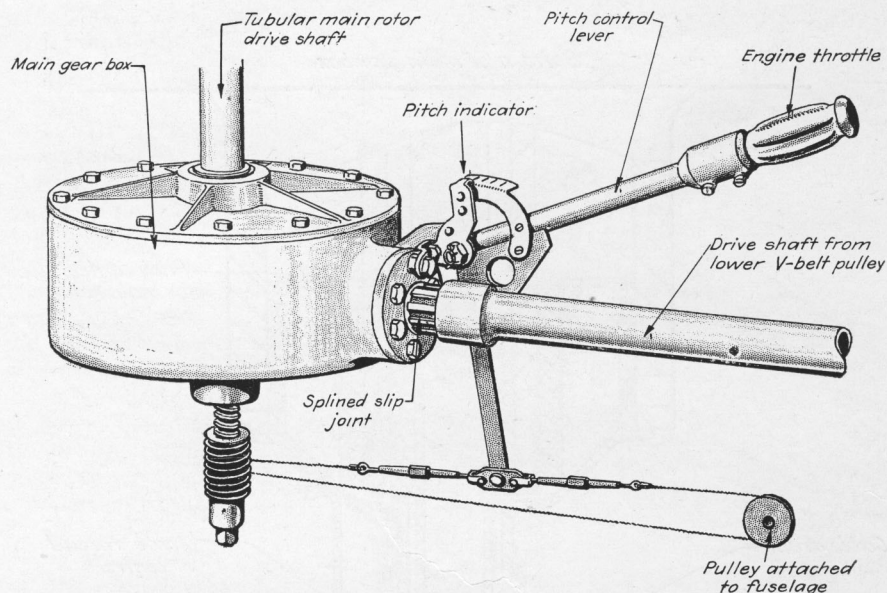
Detail sketch showing the combination of the pitch-control and throttle lever and how simply the pitch control is hooked up.
